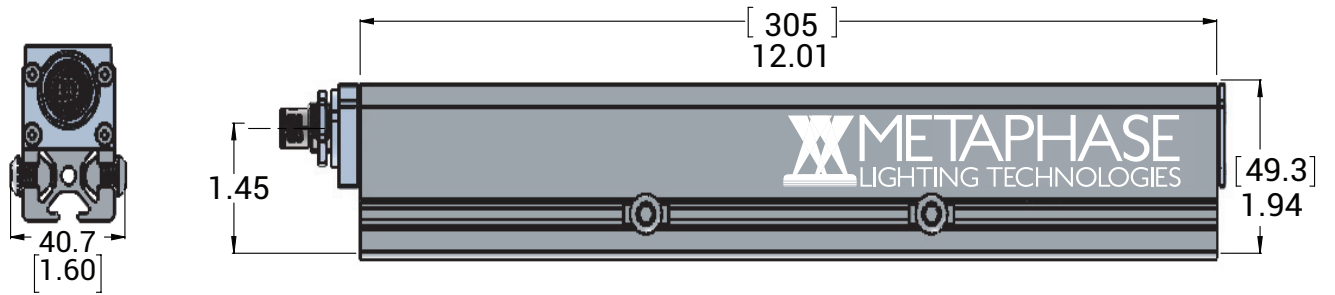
TXBR DIMENSIONS SIDE VIEW
